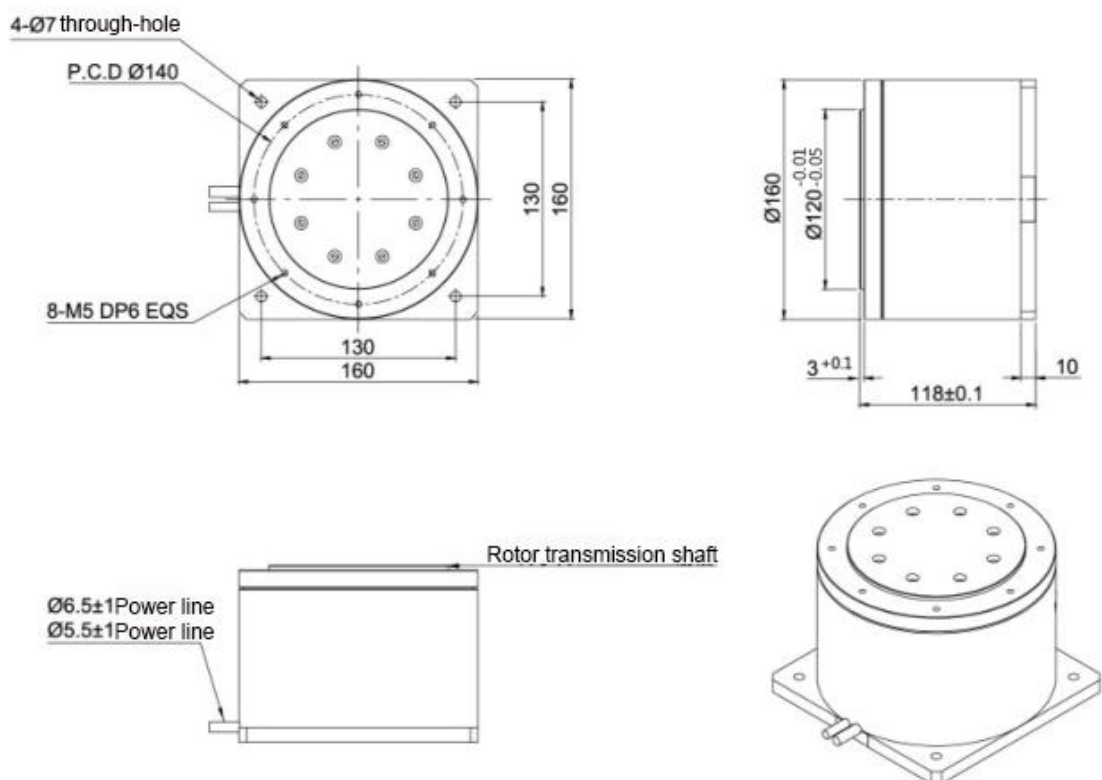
Outline dimensional drawing of WZCR-D160S-118 motor
